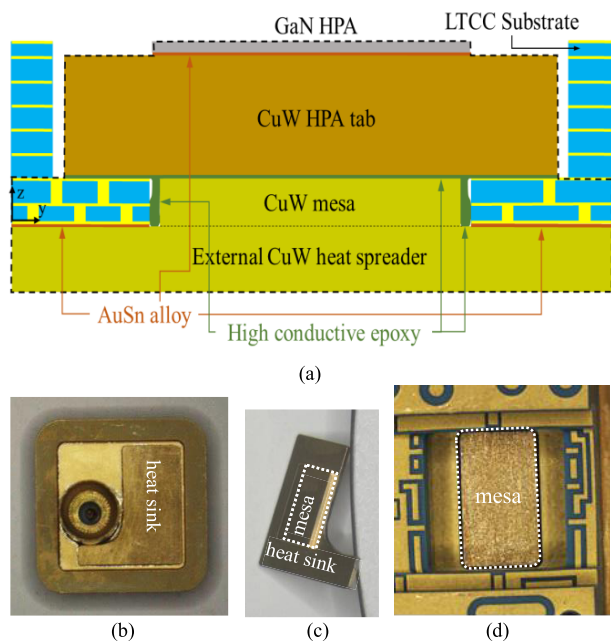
View of the hermetically soldered copper-tungsten heatsink-mesa: a) cross-sectional view, b) external module view after soldering the heatsink to the LTCC substrate, c) before soldering, and d) the internal view of the module: the mesa inset can be seen within the LTCC through-cavity shown in Fig. 2. The mesa dimensions are 2.94 mm × 5.26 mm × 0.43 mm.
